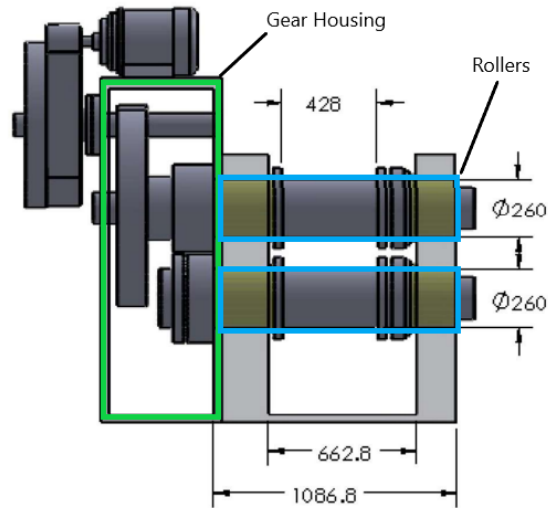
Front view of the machine with additional details (dimensions are in mm)
